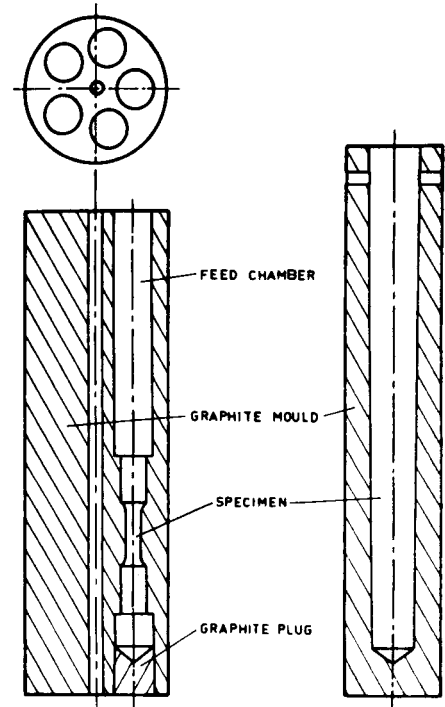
The mould for pure aluminium crystals is shown on the right. On the left is a mould with reduced cross-sectional area for growing alloy crystals. To remove the alloy crystals, the mould must be carefully sectioned.
